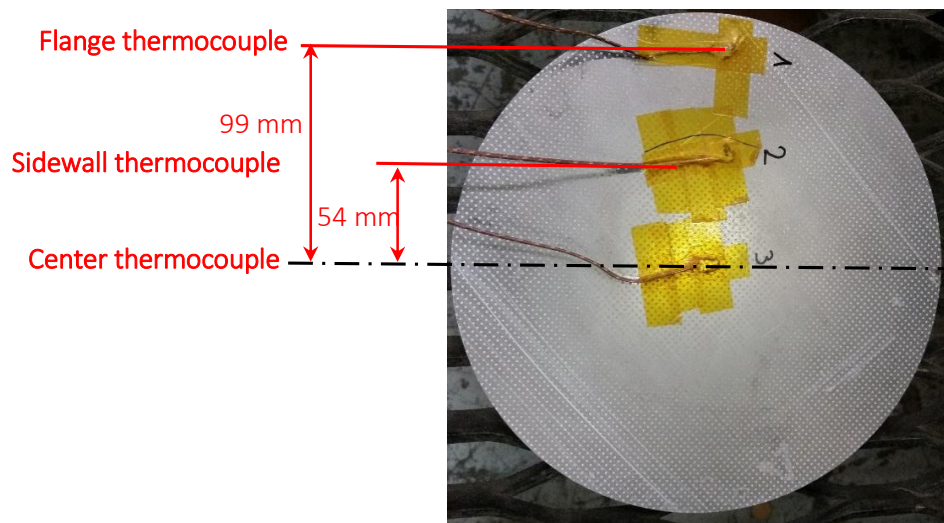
Thermocouple positions on AA7075 T6 deep drawing disk
